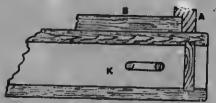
Part Longitudinal Section of Bottom Book of Workbox.
